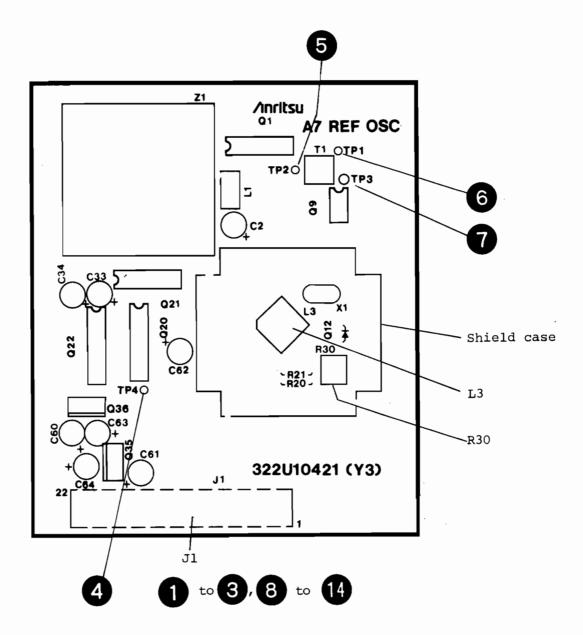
(a) A7 REF OSC PC Board Parts Layout (Parts Side) 20
